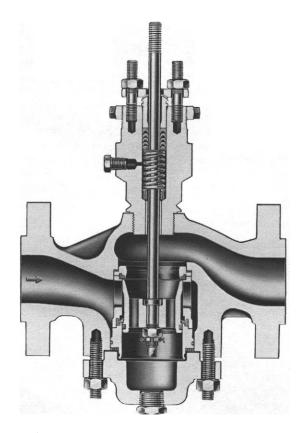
Reverse-acting cage-trim globe valve Courtesy of Emerson Process Management
